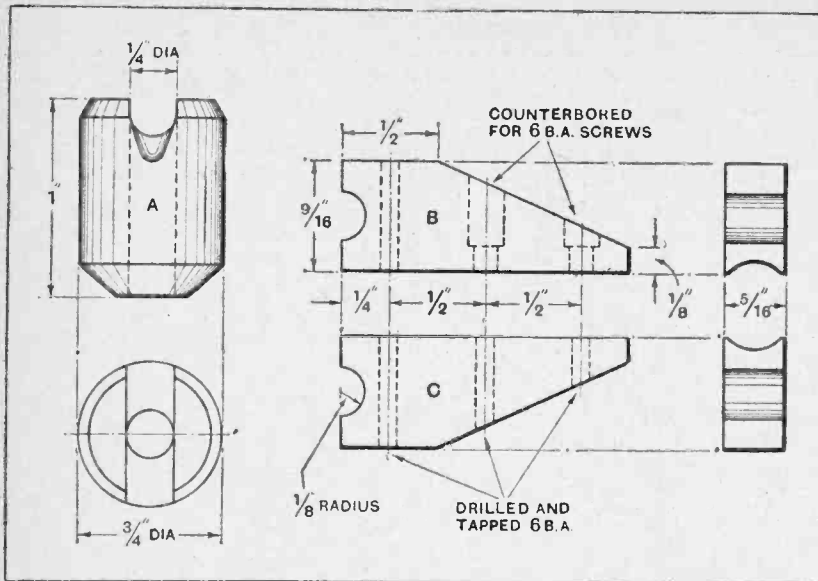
Dimensions and details of the ebontite heads A and blocks B C which carry the frame aerial wires.
